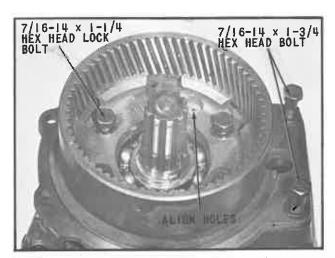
Bolting Reduction Unit Adapter to Transmission Case
